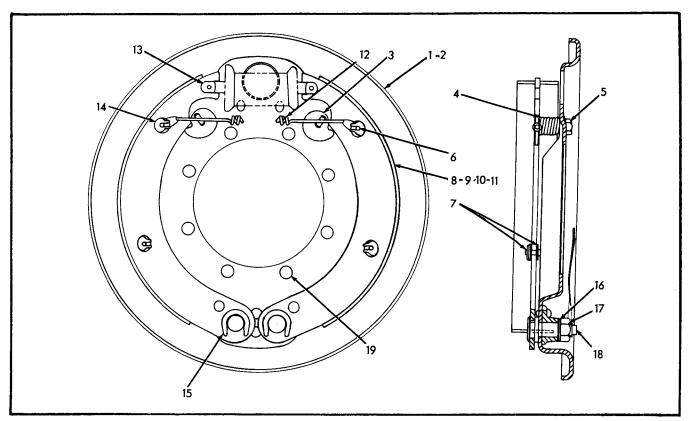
BRAKE ASSEMBLY - LEFT AND RIGHT - USED PRIOR TO TL-10 #2002
